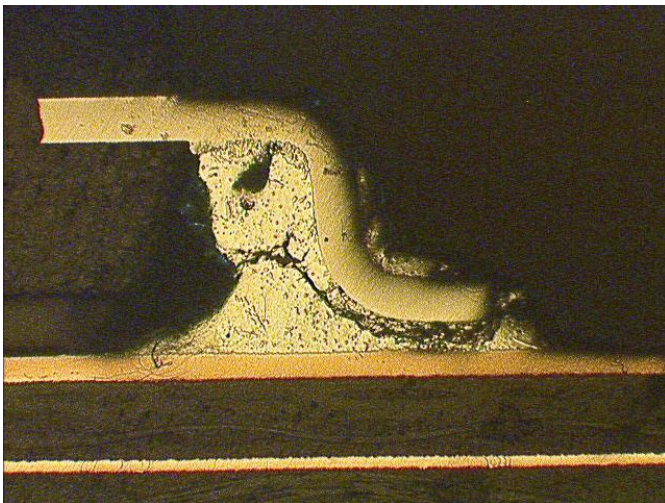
TSOP-50 Solder Joints, Board 166, Component U39, SAC305/SnBi, Failed @ 1594 Cycles
